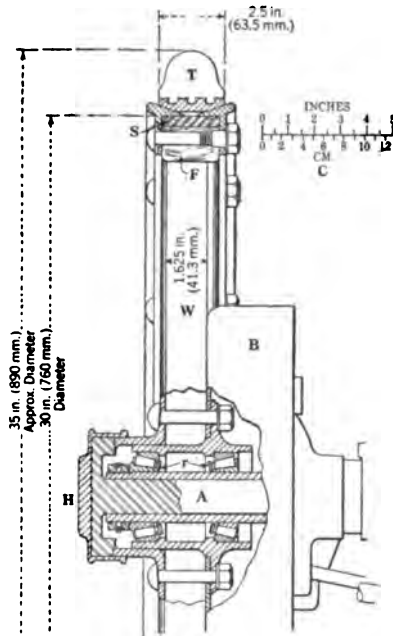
CROSS-SECTION OF REAR-WHEEL BEARING WITH WHEEL AND TIRE
